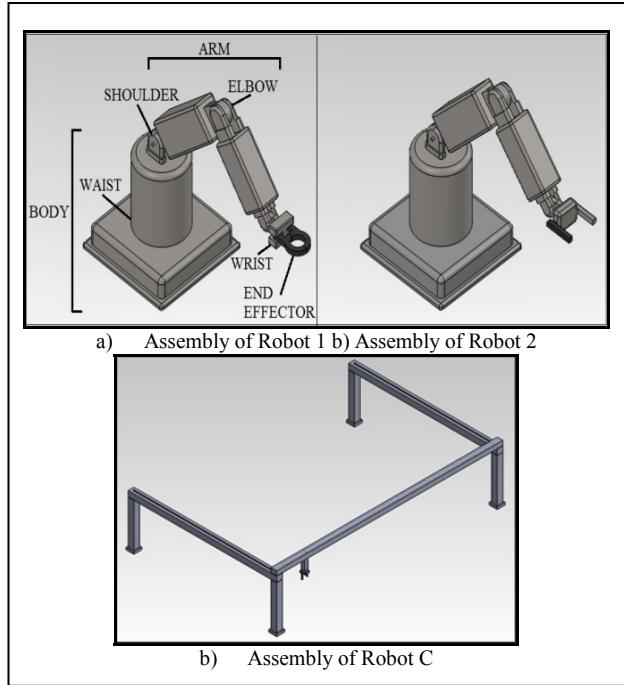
Assembly of robots: Robot 1, Robot 2 and Robot C..
